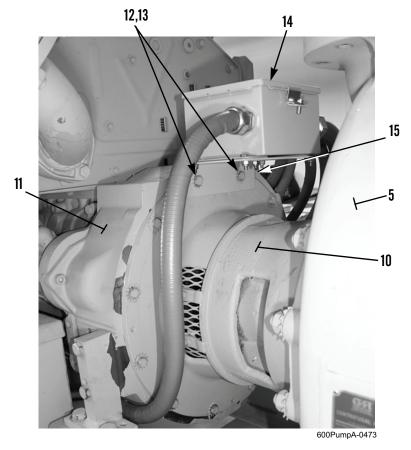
Intermediate Housing at Engine Flywheel Housing.
